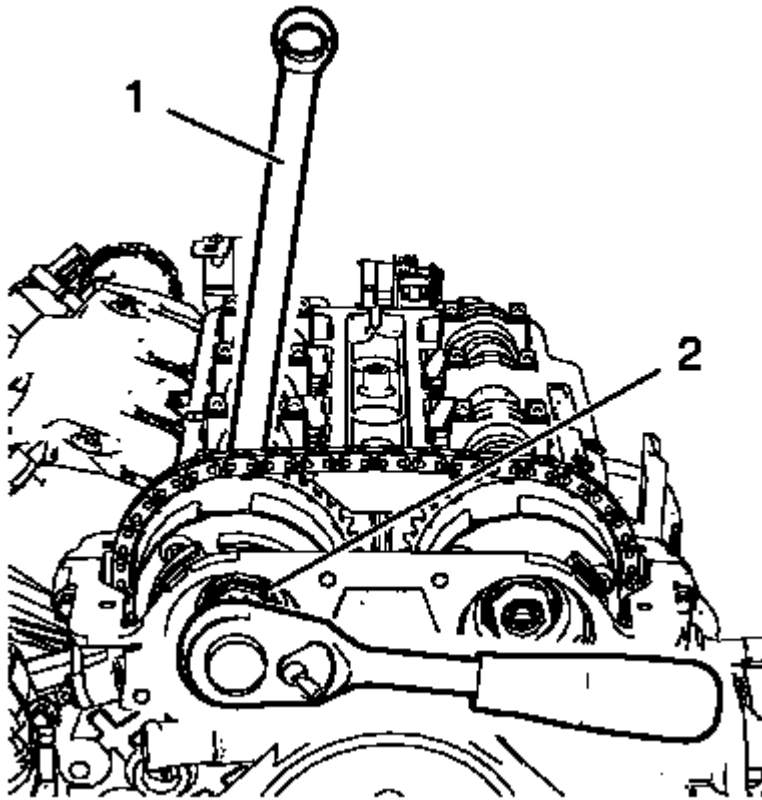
Intake Camshaft Sprocket Bolt And Hexagonal Wrench
